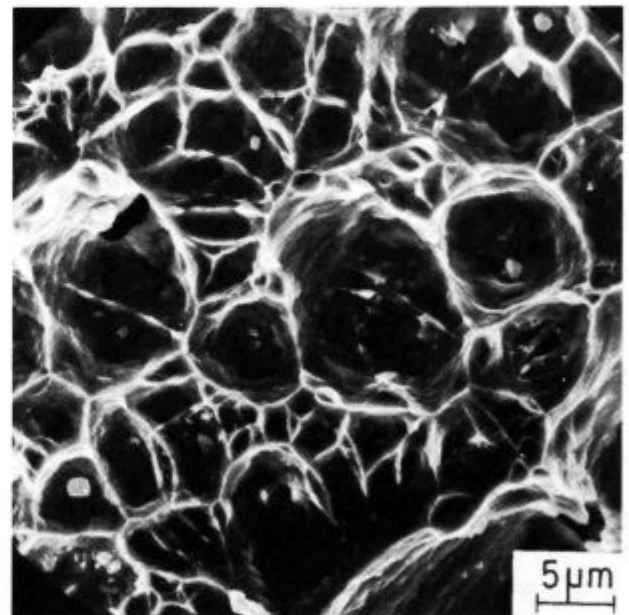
Fracture surface of the specimen C/7 brazed with Cu
